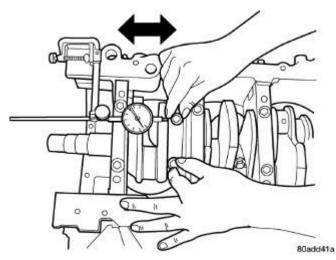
Connecting Rod Side Clearance Measuring Courtesy of CHRYSLER LLC
